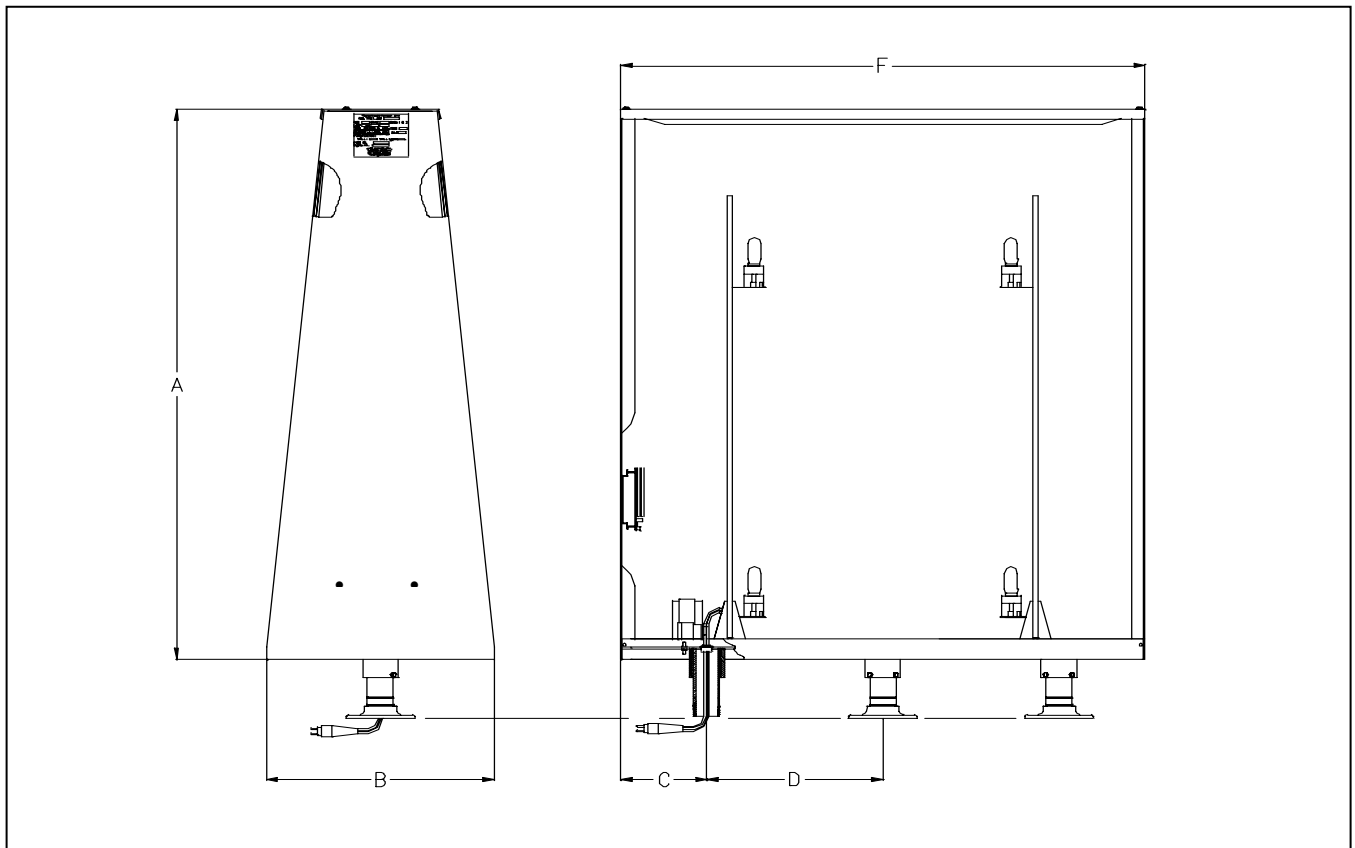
L-858 Low VA Sign Dimensions (Size 4)
